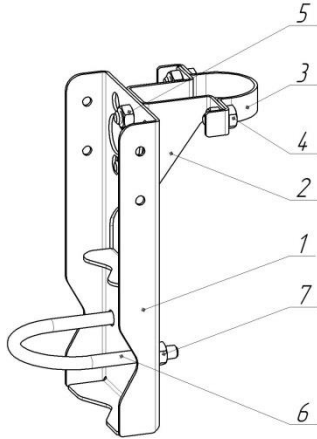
Steel horizontal bracket. Mounting kit type 1
